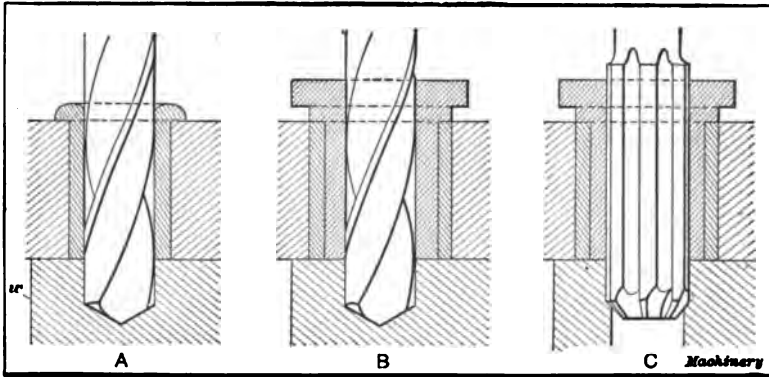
Fixed and Removable Guide Bushings for Drill Jigs
